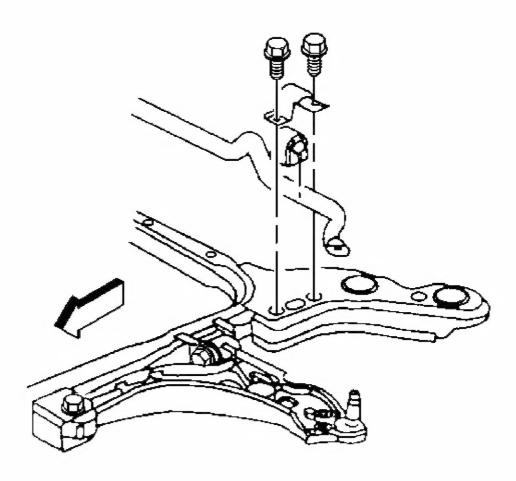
Removing/Installing Stabilizer Shaft Insulator Courtesy of GENERAL MOTORS CORP.
